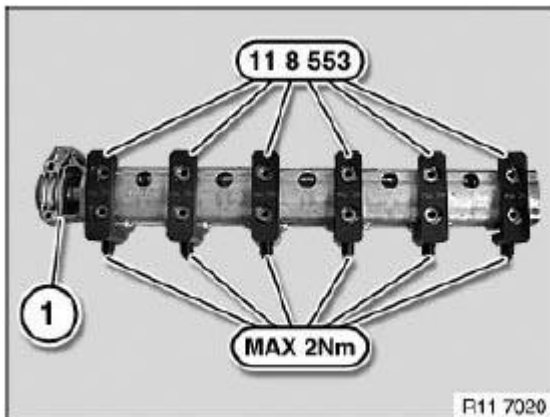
Identifying Bearing Strips And Special Tool 11 8 553
